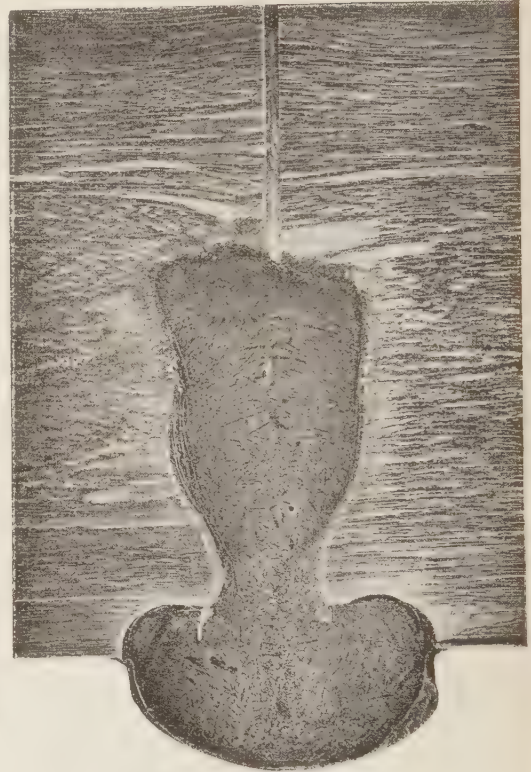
Thermit-pressure weld (with interposed plate).
